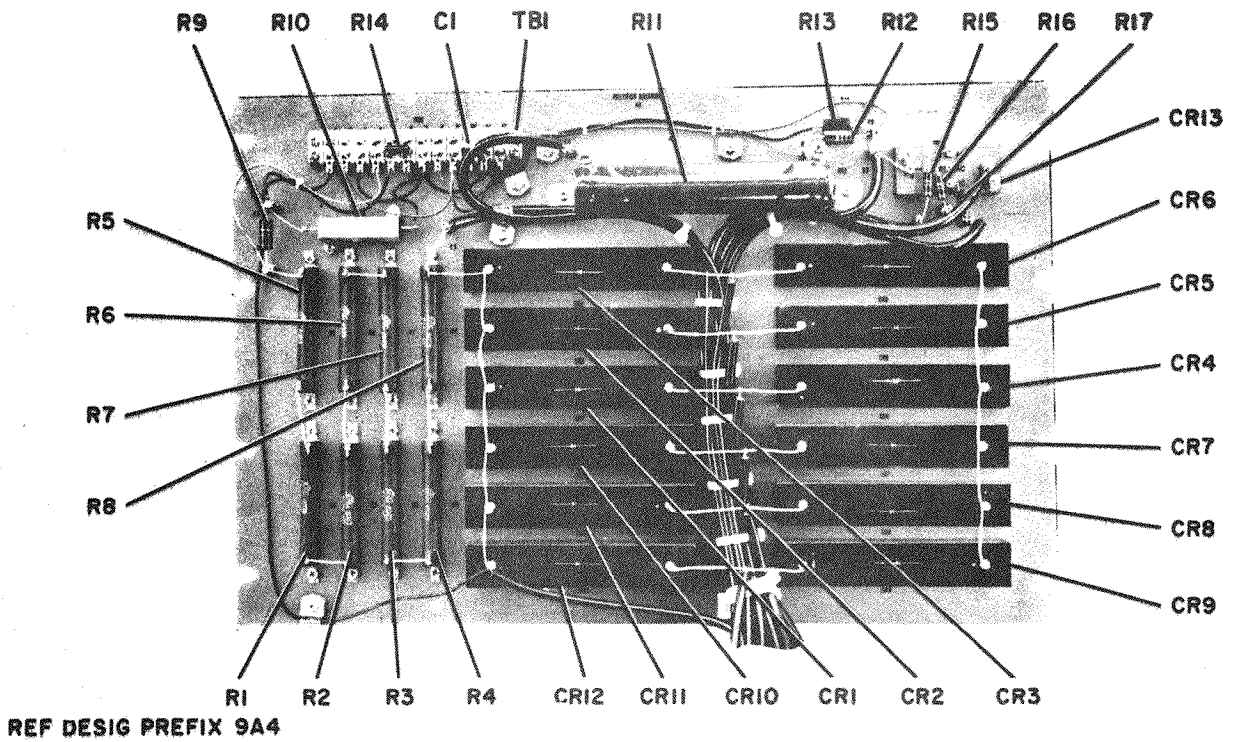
10 KW PA, Rectifier Assembly 9A4, Component Locations
